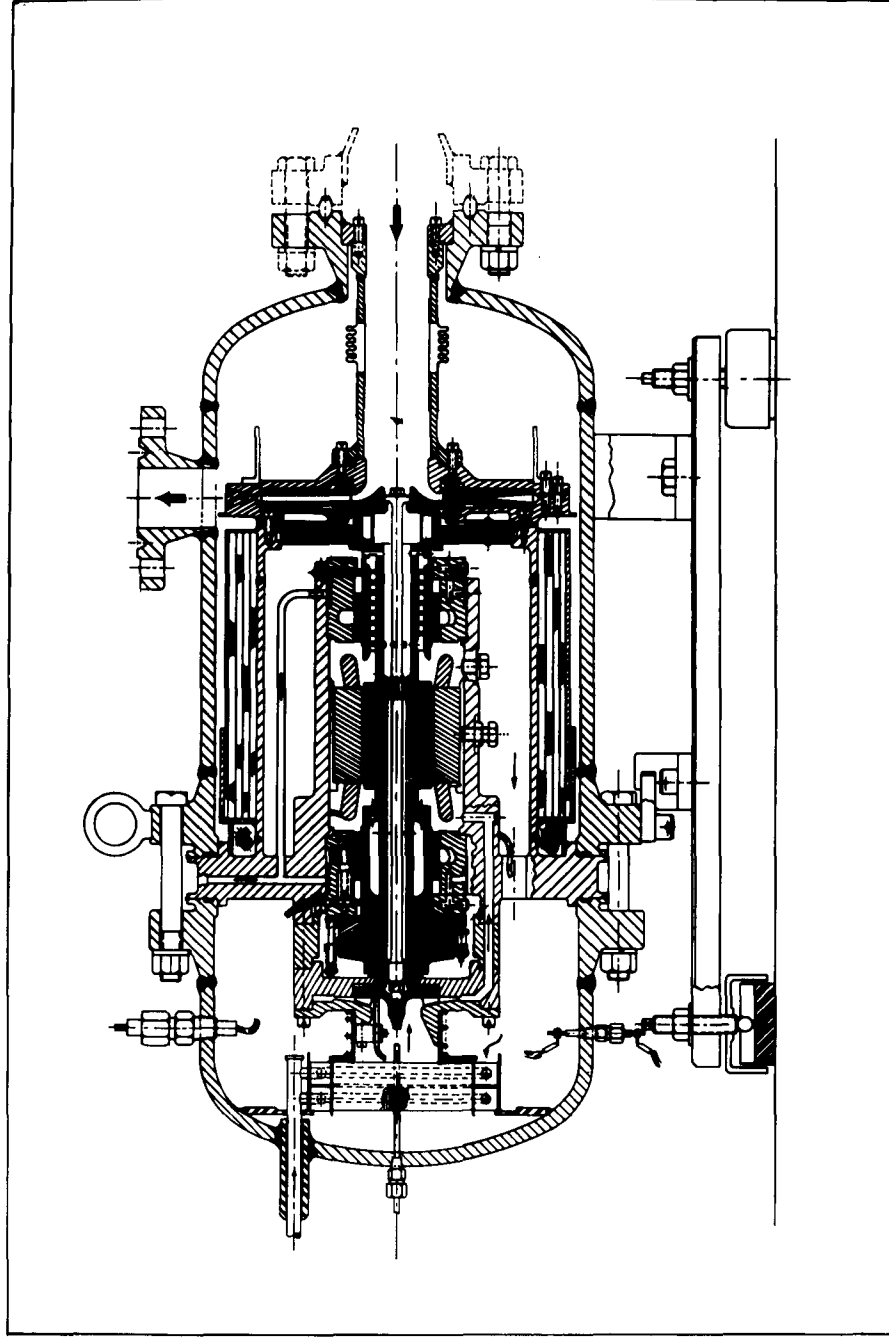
1000°F, Regenerative, MTI-Built Gas-Bearing Supported Compressor
